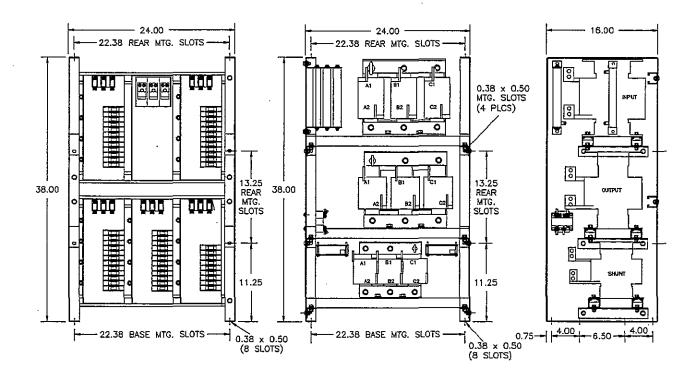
200 - 300 HP, 480 VAC Horizontal Mounting Outline Drawing
